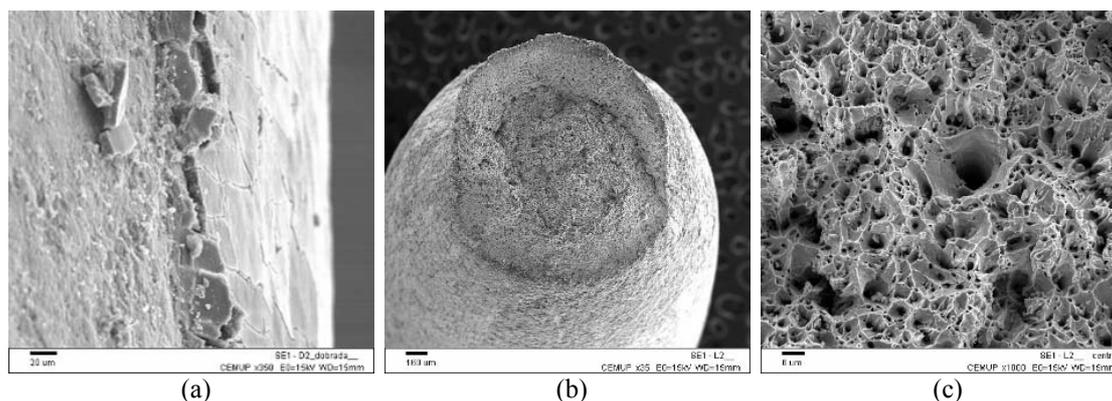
(a) Coating detachment (350x); (b) fracture surface (35x); (c) Detail of the fracture surface – micron spherical sockets (1000x).
